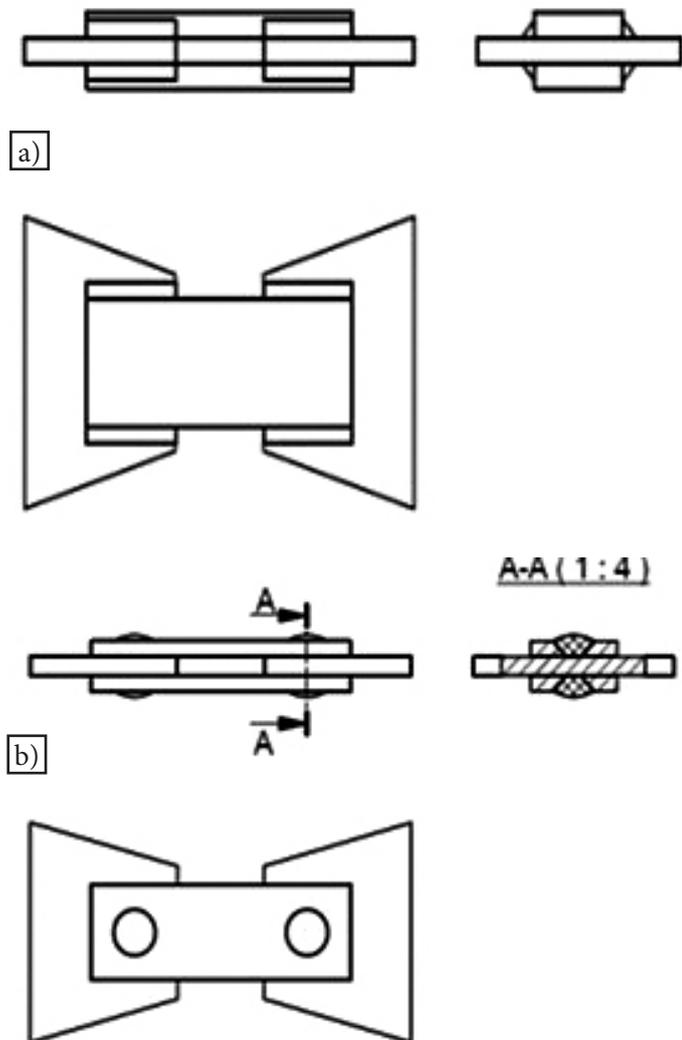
Stages of the preparation of specimens used in the shearing test of welded joints: fillet welds (a) and plug welds (b)
